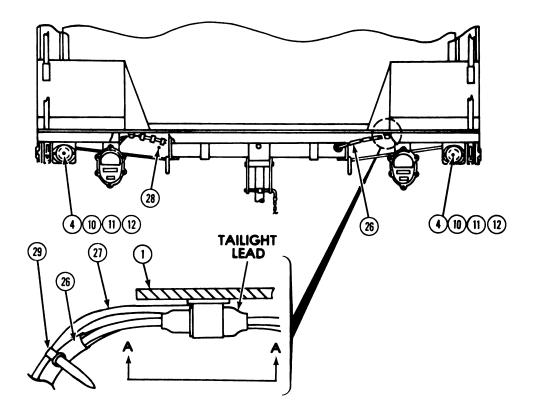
Trailer, Side, Top and Rear Views (Sheet 2 of 3)
